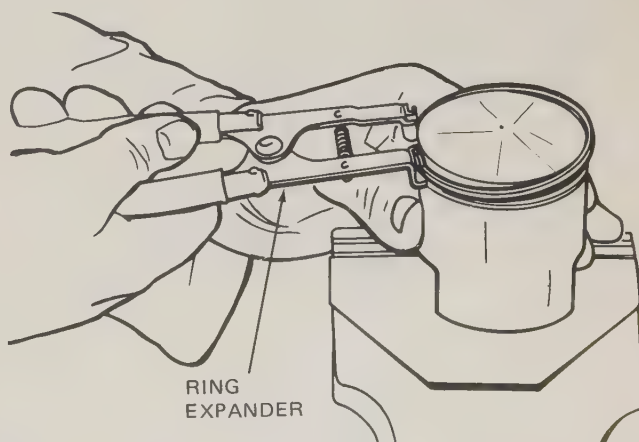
Using a ring expander to remove the piston rings from the piston. (Kohler Company)
